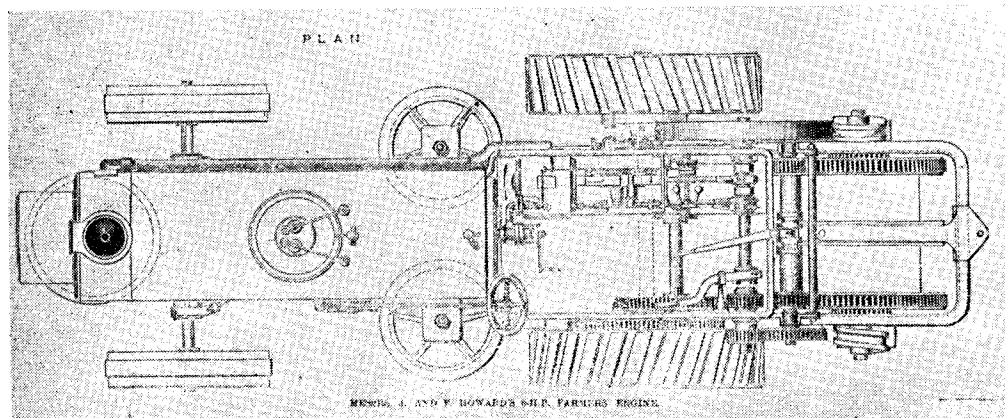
Line drawing showing plan of the engine in Fig. 30
